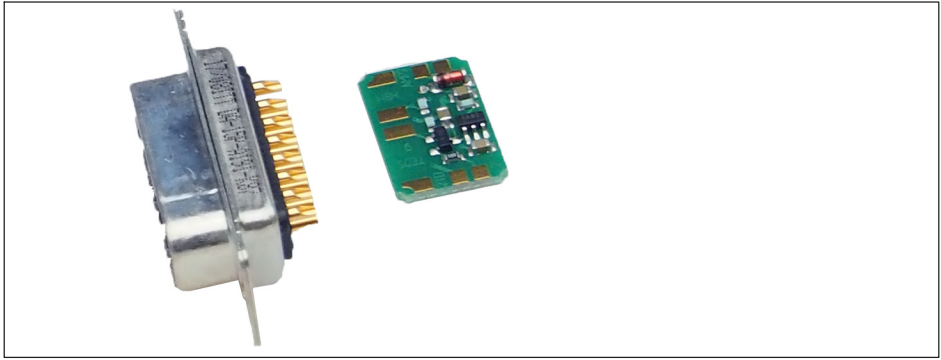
View of TEDS module with plug from below; the outer solder tabs on the TEDS module are soldered to the outer pins
